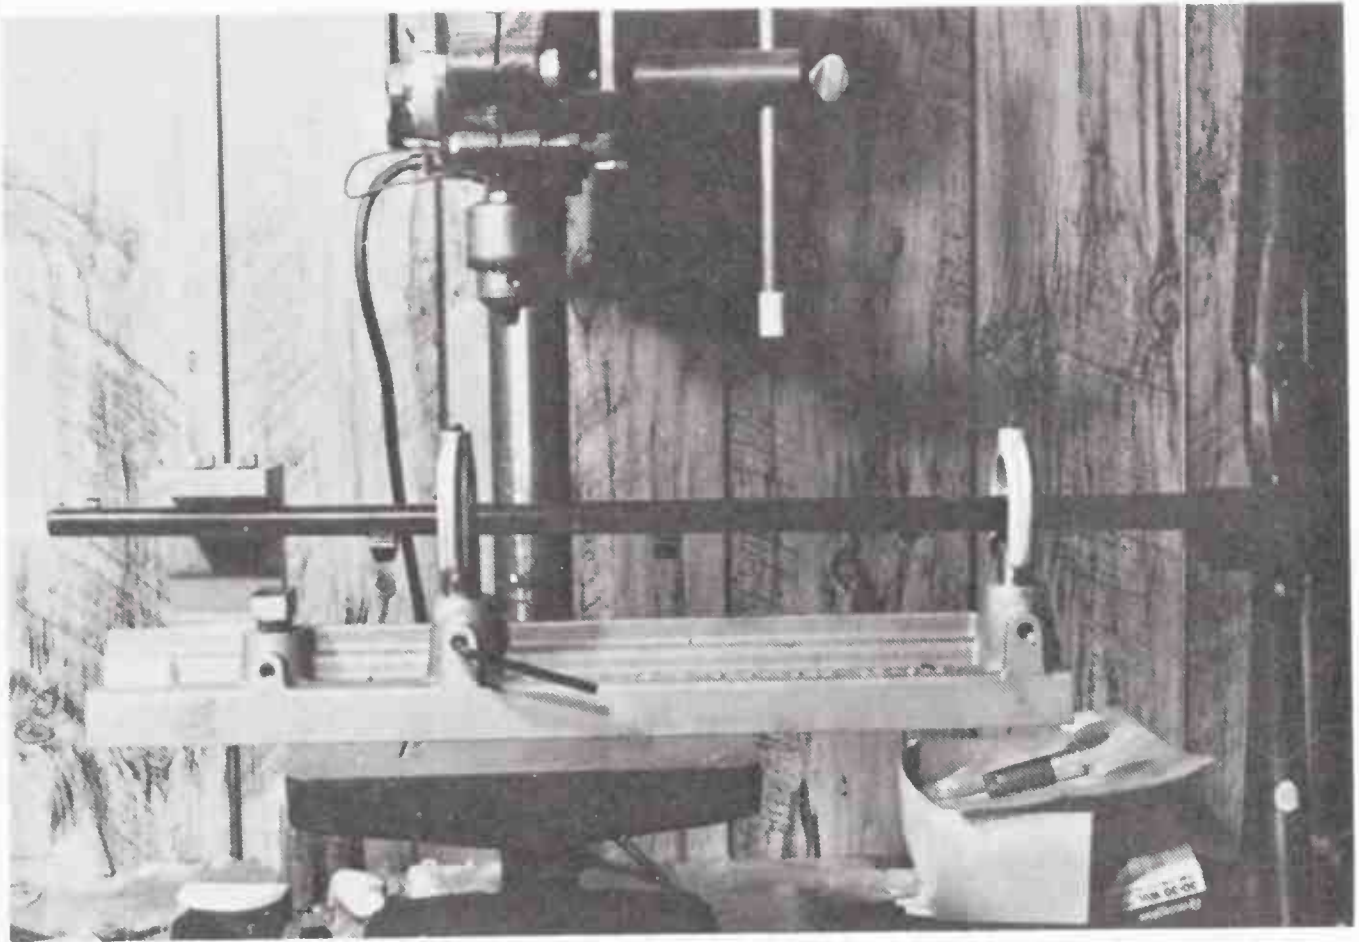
Universal sight jig set-up on drill press table ready for drilling holes for scope mounting.
